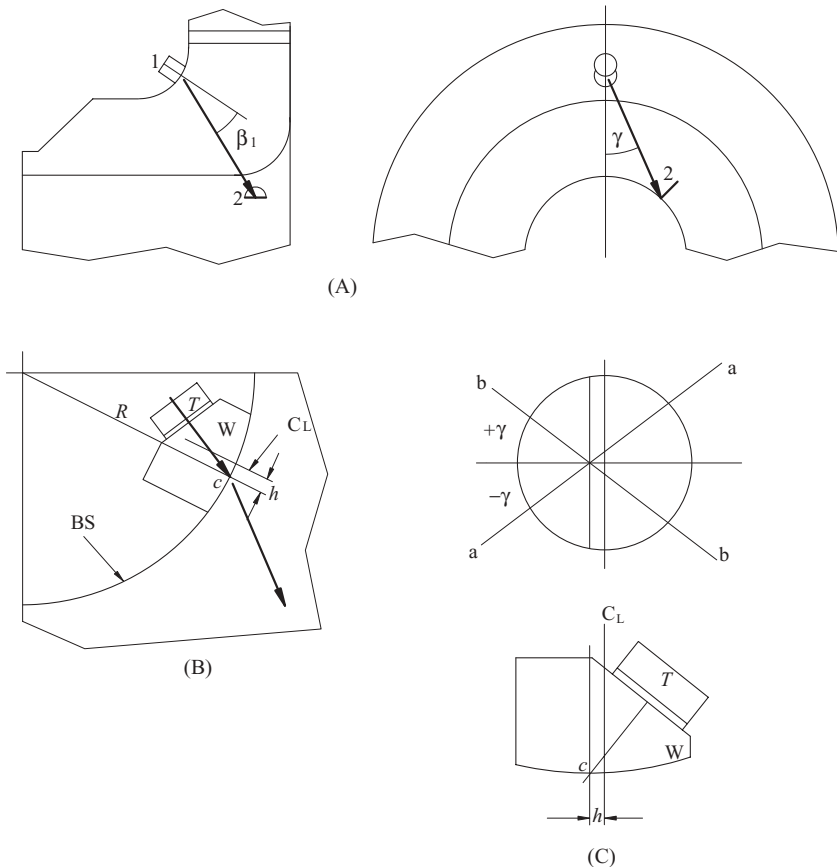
Sketches relevant to probe design for inner radius inspection. (A) Position of probe 1 on nozzle outer blank surface and flaw model 2; (B) position of wedge W with transducer T on the blend surface BS; (C) conceptual wedge design.
